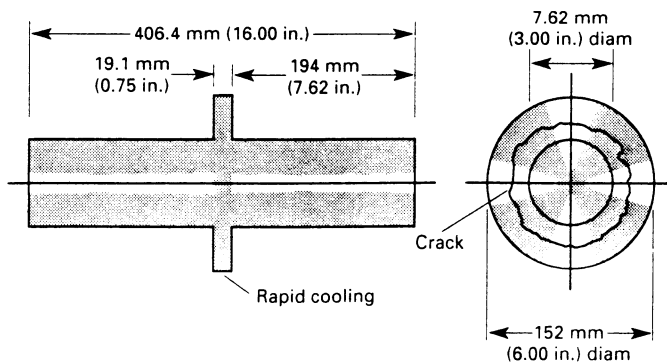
Steel flange design prone to quench cracking
